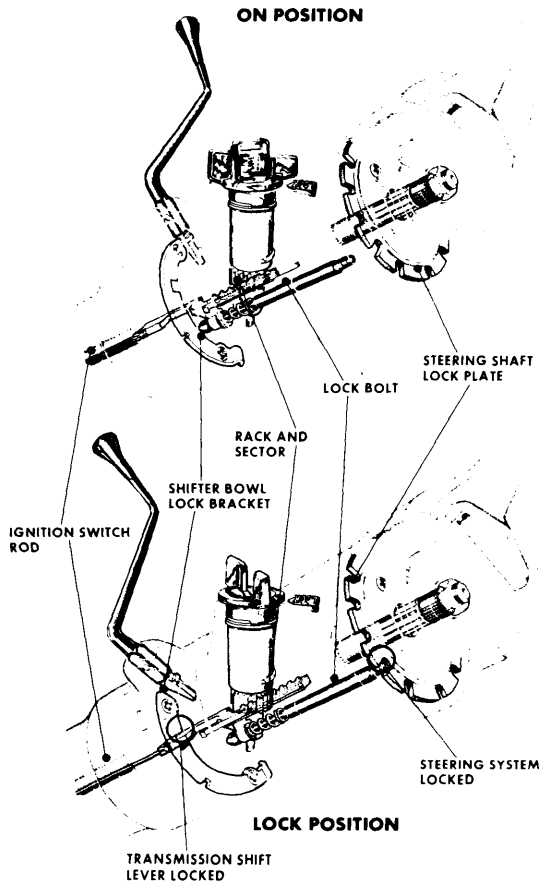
Internal View of Steering Column Locking Mechanism Except Chrysler Corp. Standard Steering Column
